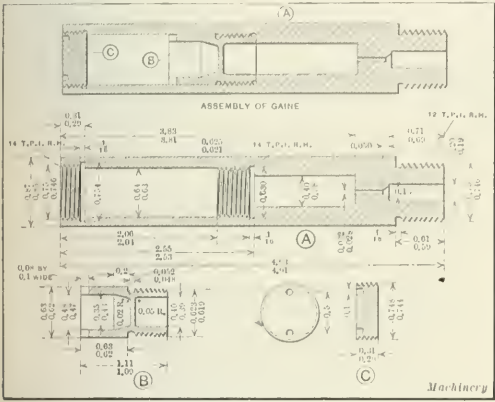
Assembly and Details of Gaine used in British No. 100 Graze High-explosive Shell Fuse
